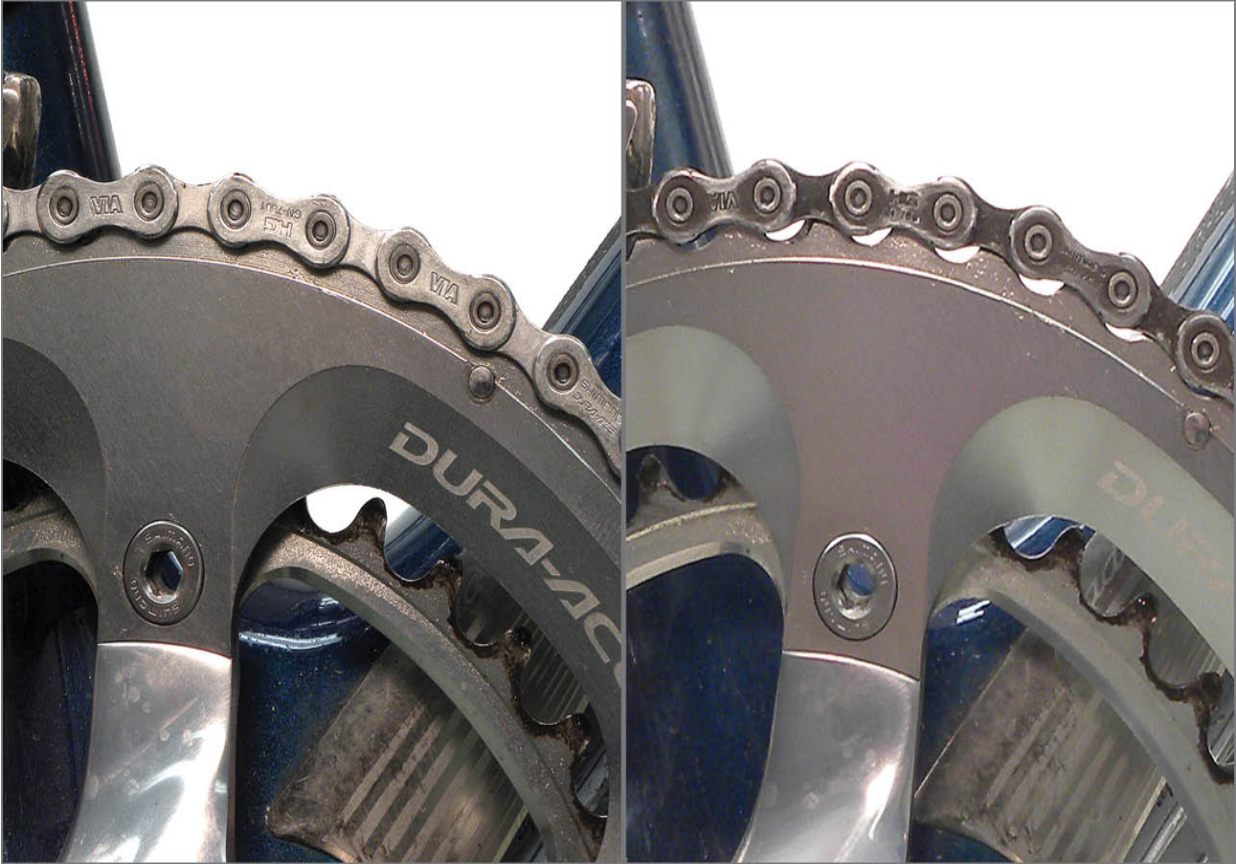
Left: new chain fully engaging teeth of sprocket
